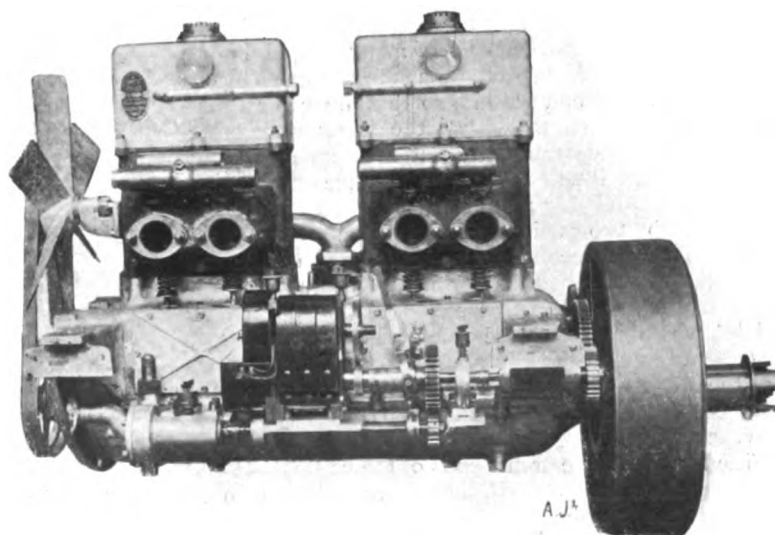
The 4-cylinder Gobron-Brillié Engine from the left side, showing the Exhaust-Valves, the Magneto, and the Water Pump; this engine has eight pistons.
